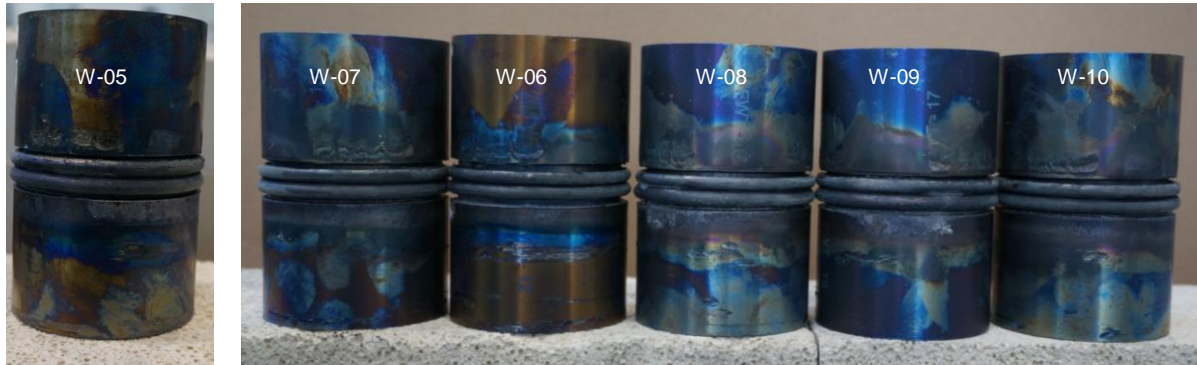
Successfully welded specimens (welding order = left to right)
